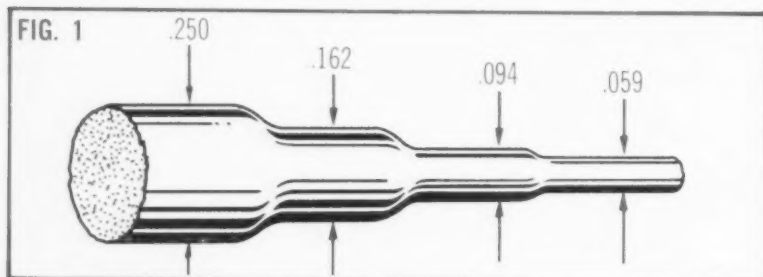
Progressive swaging reduces the diam of aluminum-lead alloy wire.
